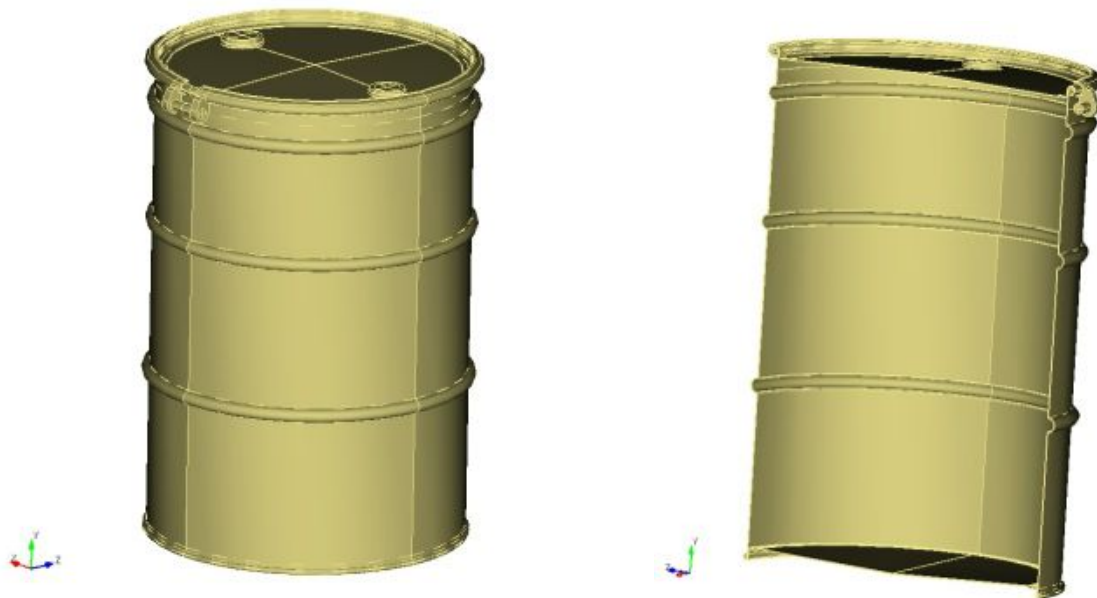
Szolnok CQ5508 Drum CAD geometry
